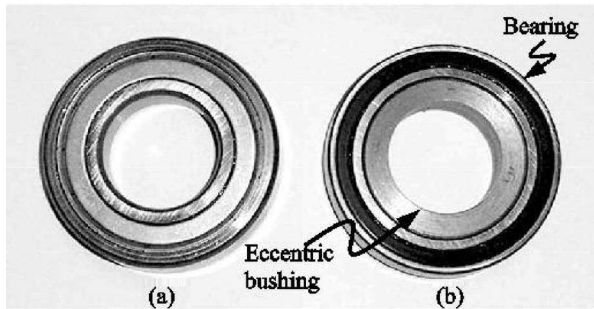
(a) Original bearing. (b) Bearing and eccentric bushing.
